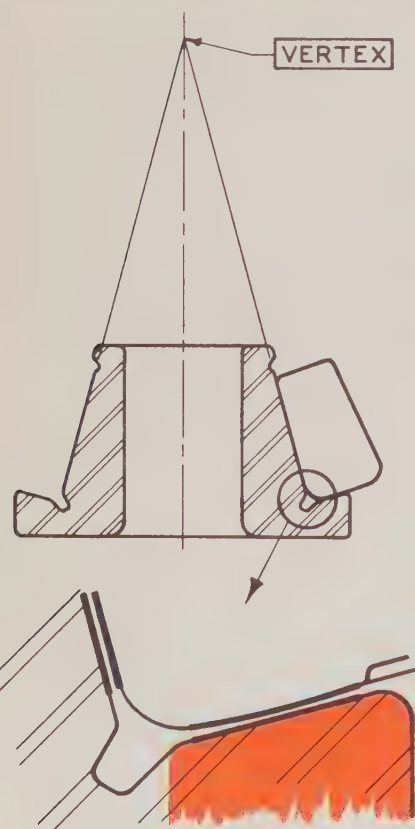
This cross-sectional drawing of the tapered roller bearing inner race and the enlarged view of the rib face area (in color) show the relationship between the functional surfaces (heavy lines) of the bearing roller and race.
